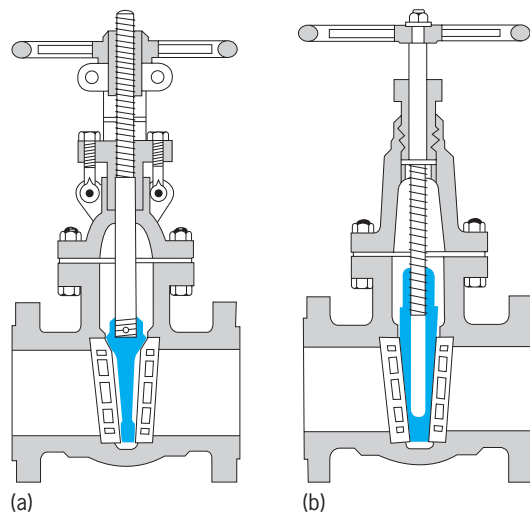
Gate valves with disk gates shown in color. (a) Rising threaded stem shows when valve is open. (b) Nonrising stem valve requires less overhead.
